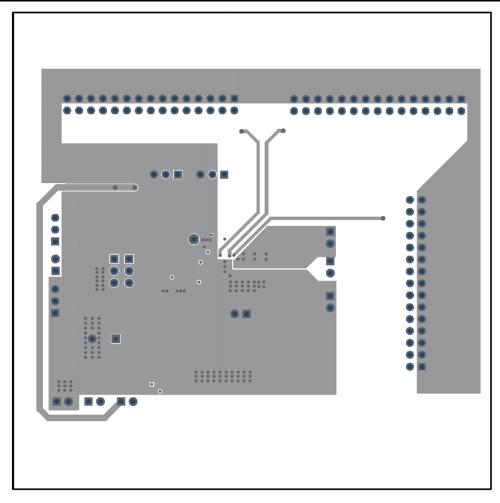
TPS61094EVM-066 Bottom Side Layout
